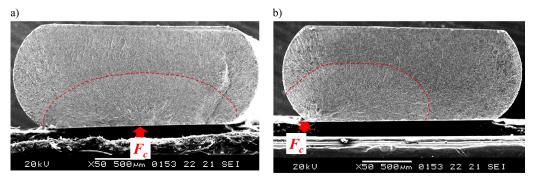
SEM photographs of a fracture surface of two kinds of tapes obtained by the alternating-plane bending fatigue test: a) non-implanted, b) implanted with $2.5 \times 10^{18} \text{ J/cm}^2$.
